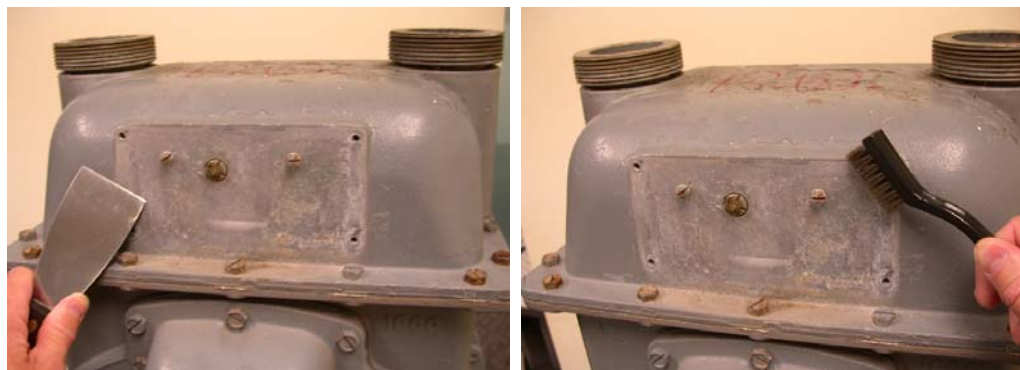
4. Removing Old Gasket Material with a Scraper and a Wire Brush
